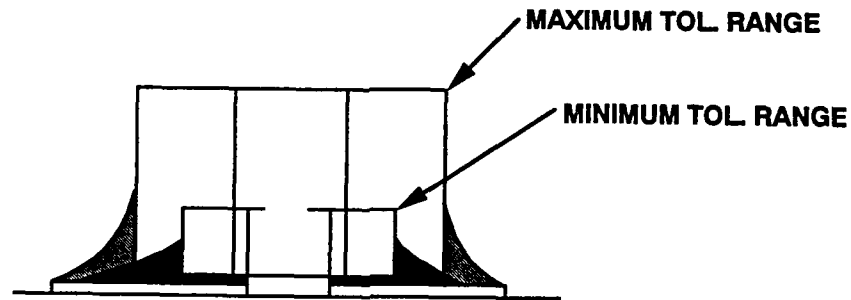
Chip Component Pad Dimensioning
